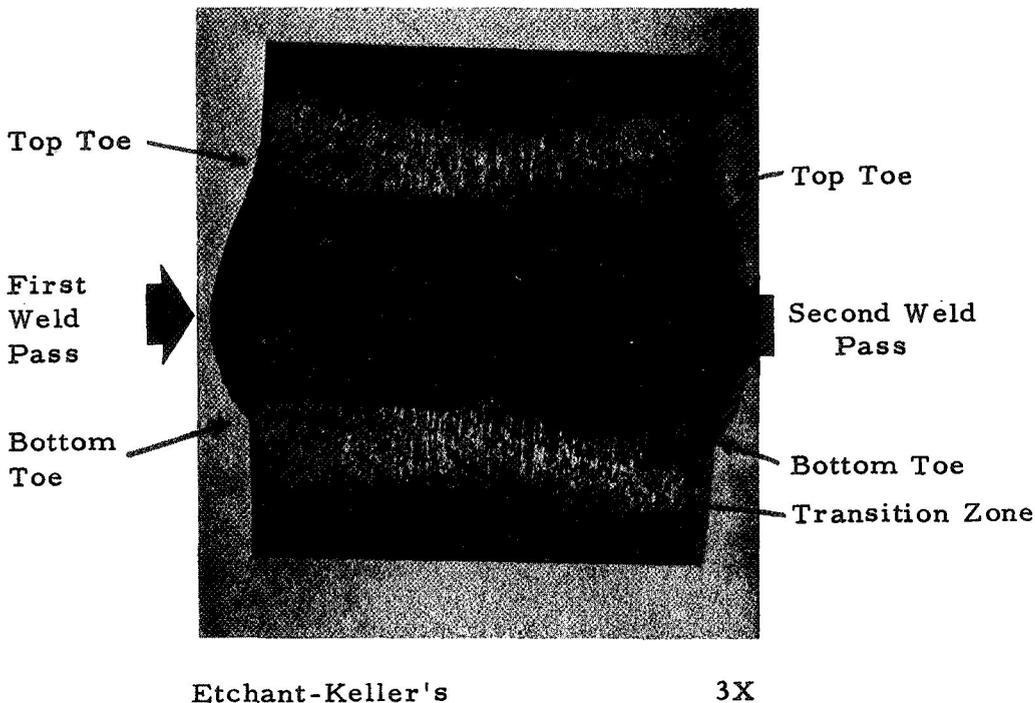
Typical Cross Section of a Two Weld Pass Square Butt 2219-T87,
